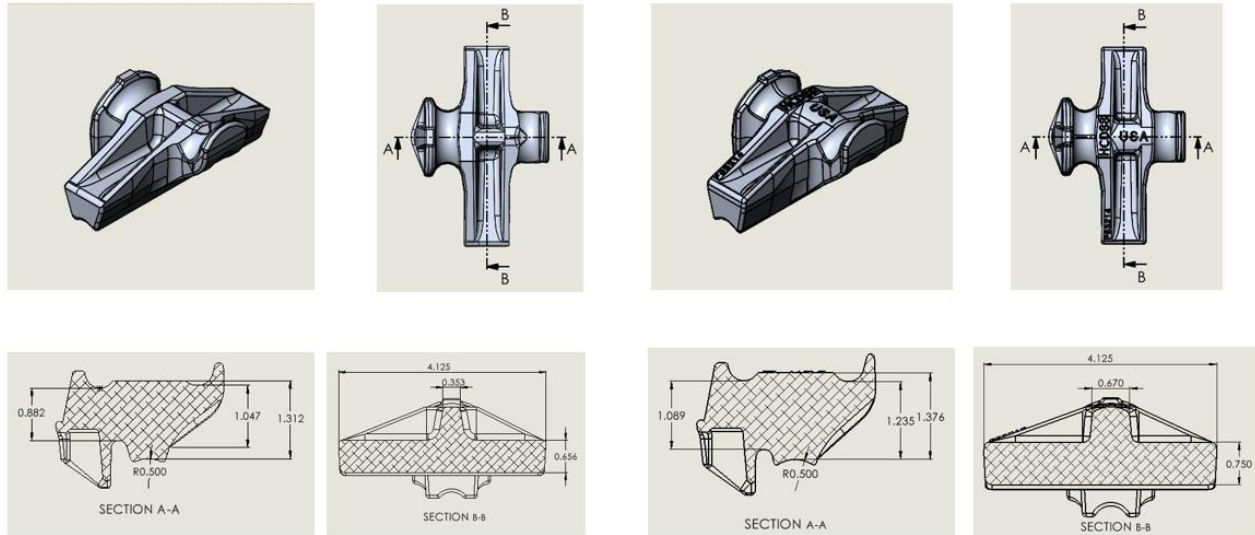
Enhanced HCD88 Keeper Cross-section Drawing
